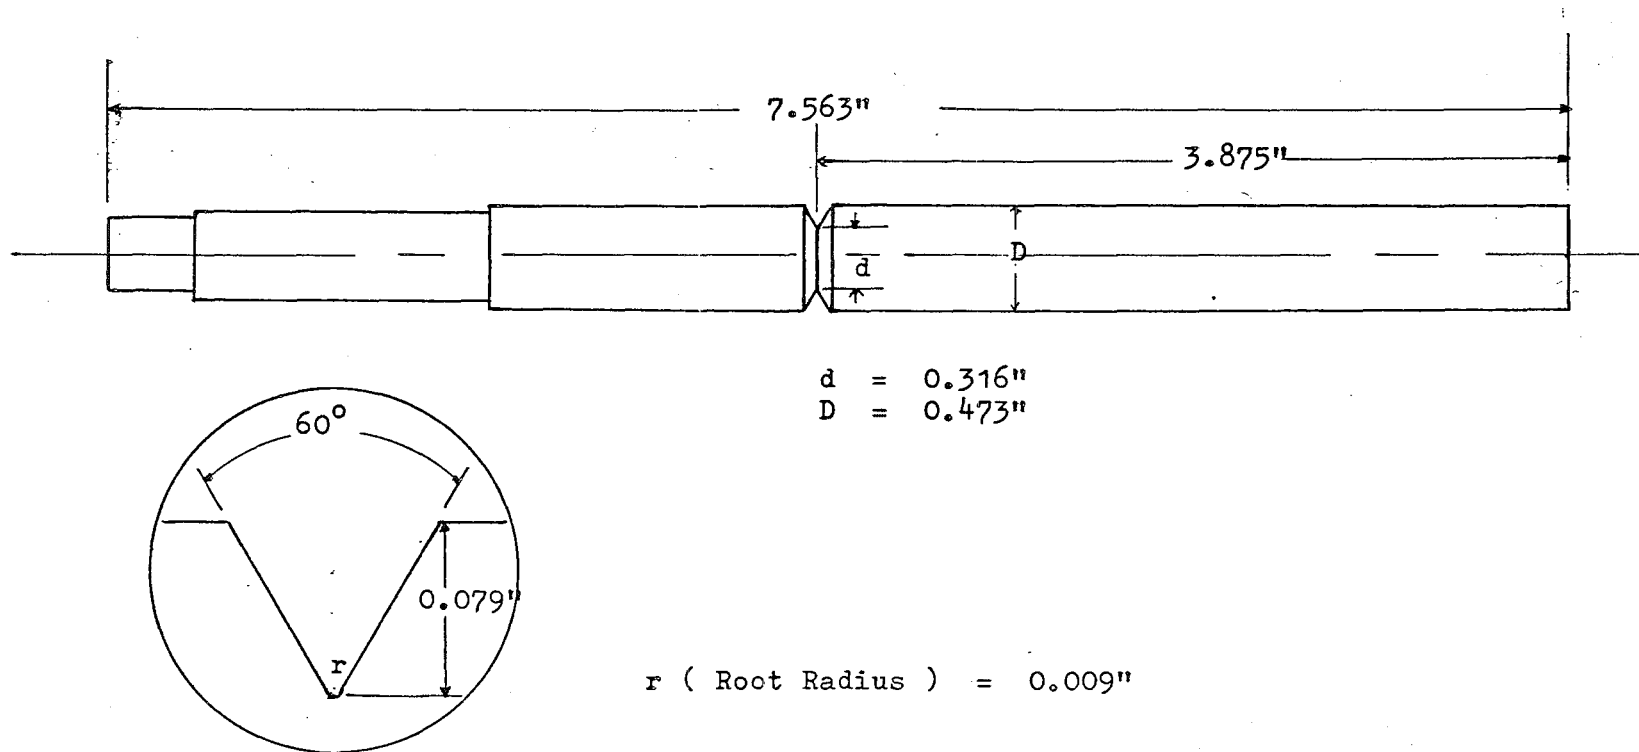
/8: Details of notched rotating beam fatigue test specimen.
